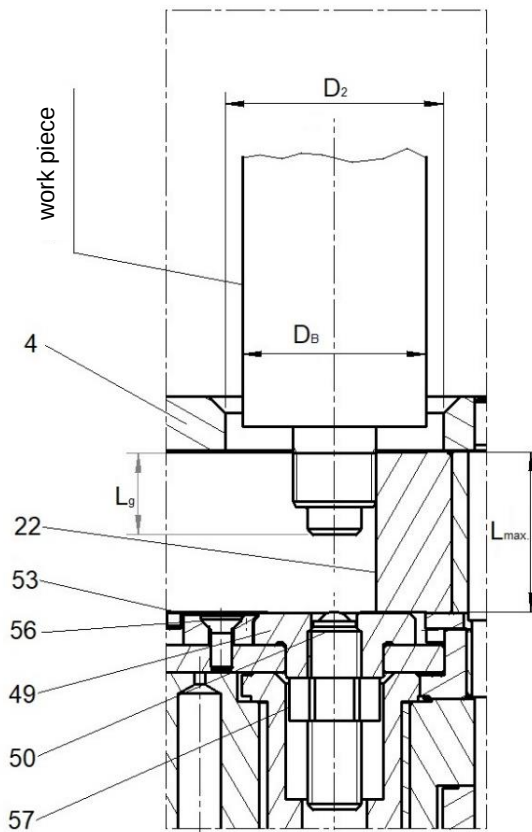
Setting the thread using the *rolling system radial EW 1/2
